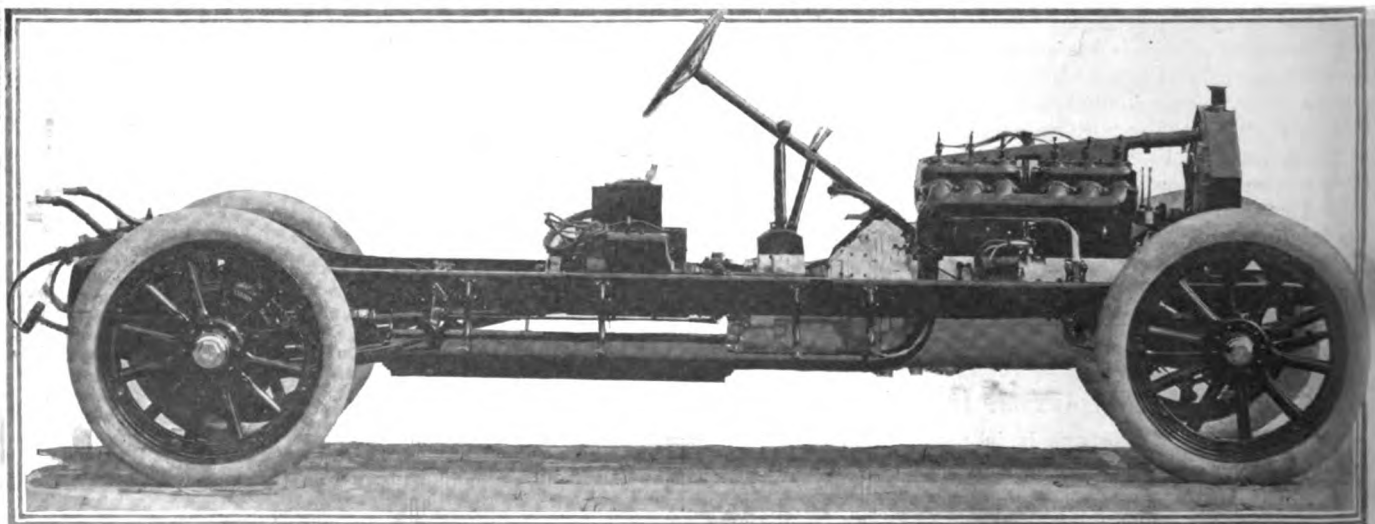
Side view of chassis; note long low-hung frame with rear spring dropped below the rear axle
